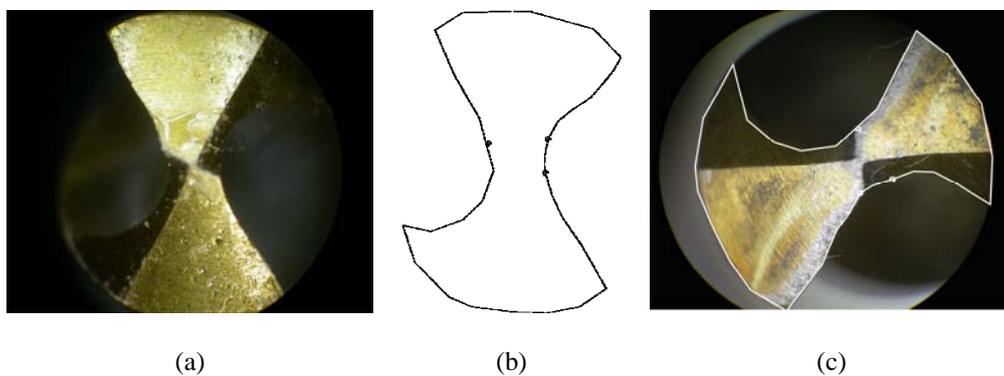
Photos of TiN coated HSS twist-drill: (a) new cutting edge; (b) template of cutting edge; (c) failure cutting edge with template
